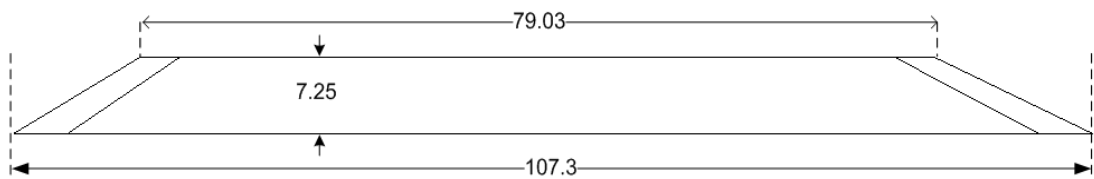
Geometric Details of the D57 Strake Panels [All dimensions are in inch]
